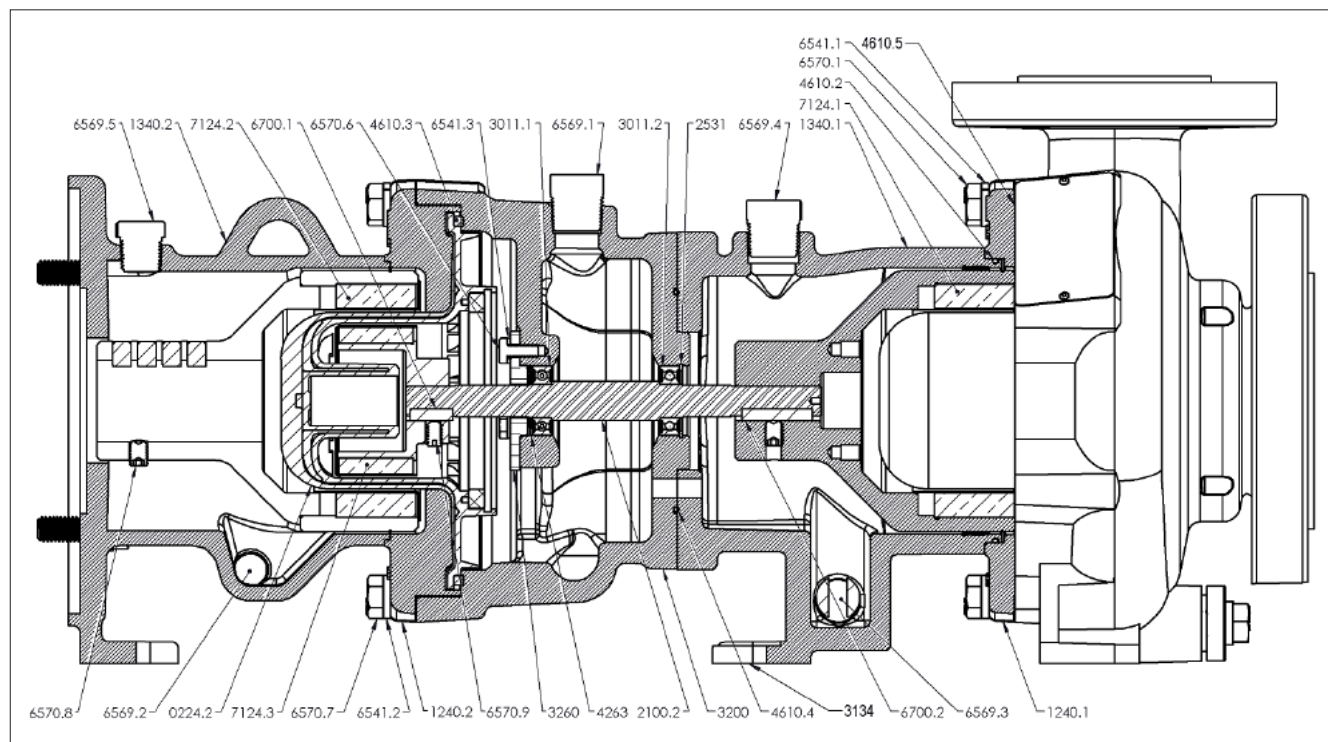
Sectional Drawing Dual Drive A/E sizes.
